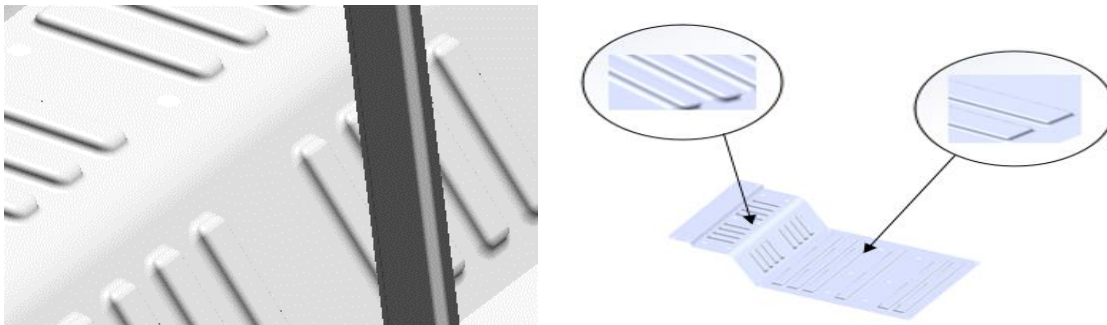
shows the model of Floor panel of Bajaj Qute structure
